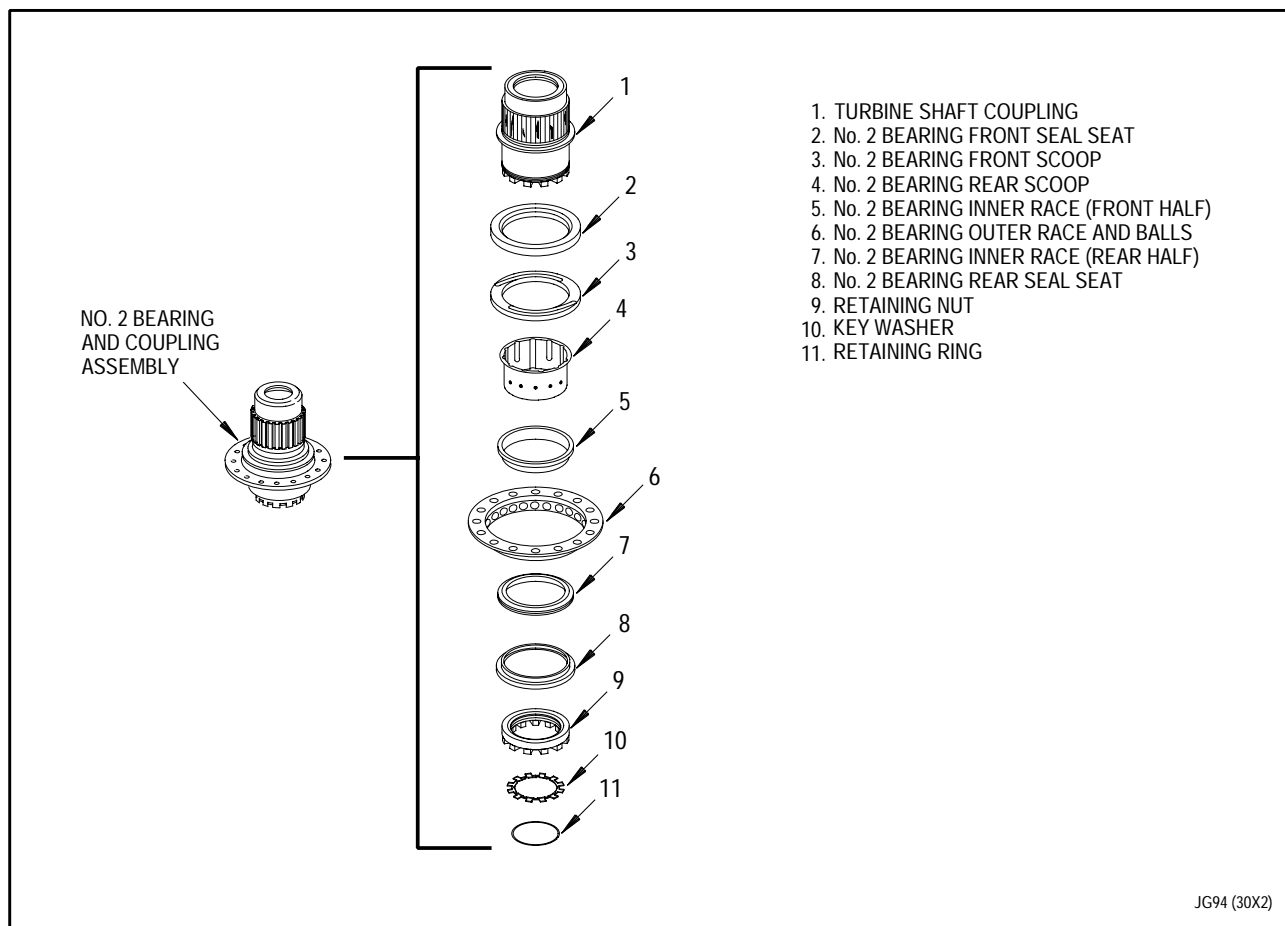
No. 2 Bearing and Coupling Assembly - Assembly
